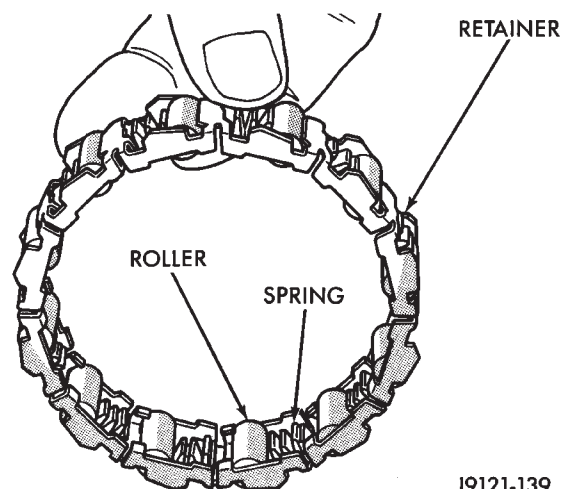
Overrunning Clutch Rollers, Springs, Retainer
